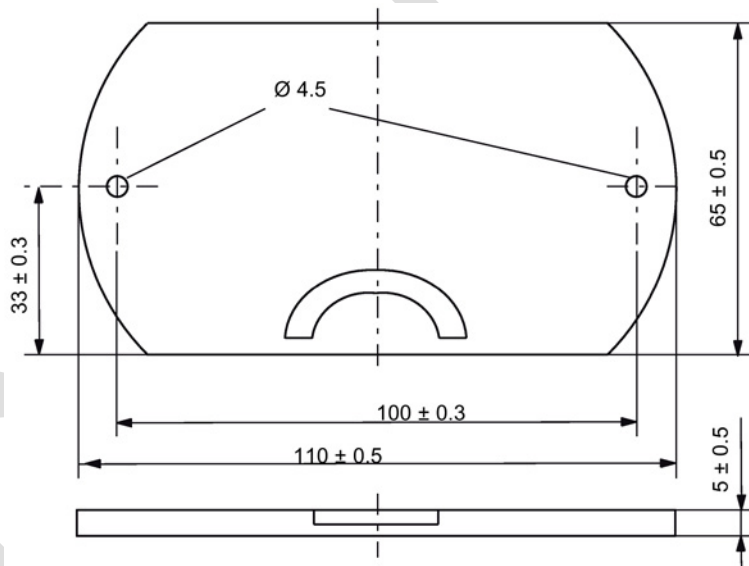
Dimension drawing of fixing pocket 6GT2390-0AA00
